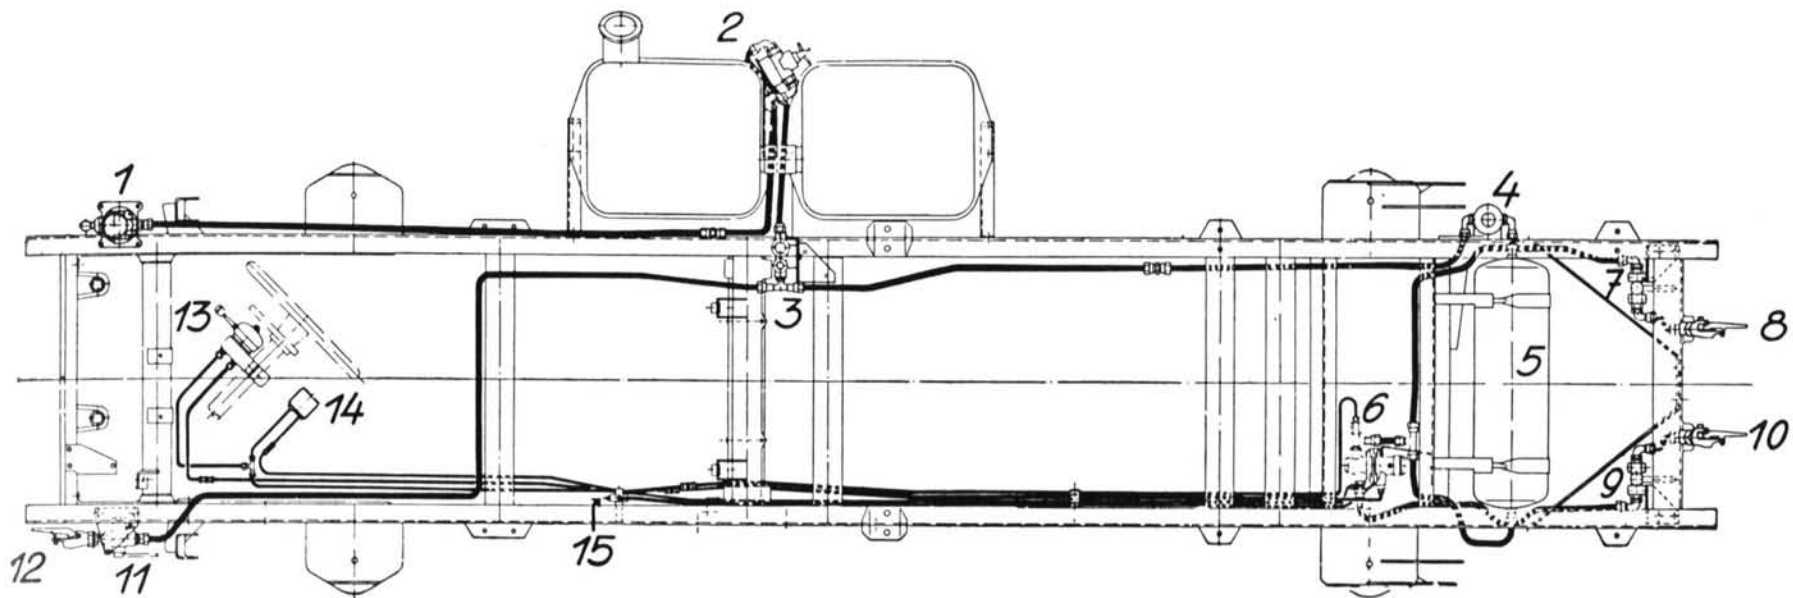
Diagram of the compressed-air control for the two-line trailer brake system 404.1
